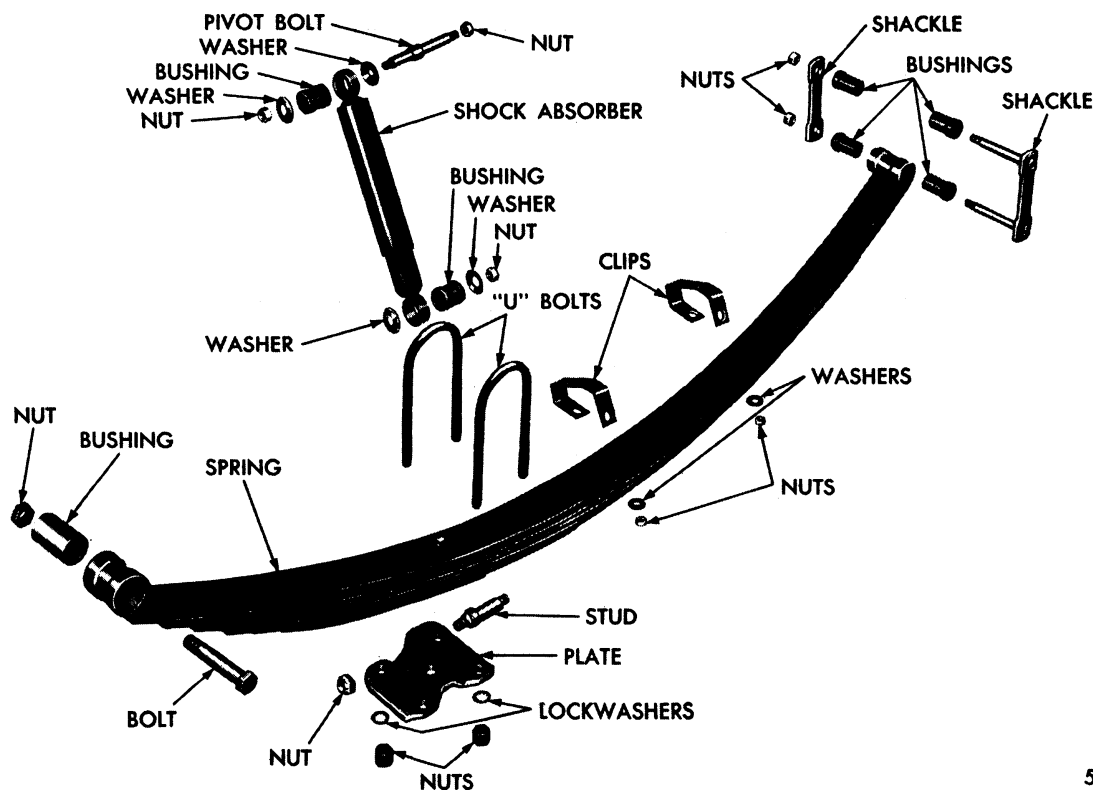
Typical Rear Springs Suspension (Disassembled View)
